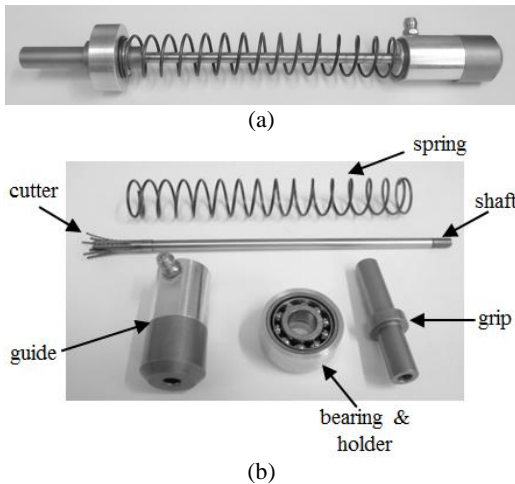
New design of deburring tool: (a) assembly and (b) components of the new design.
